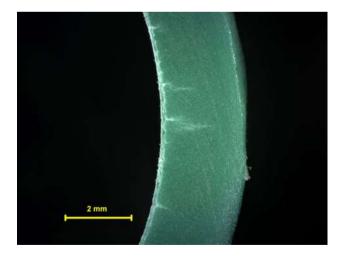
Radial crack growth from interior wall of failed pipe specimen
